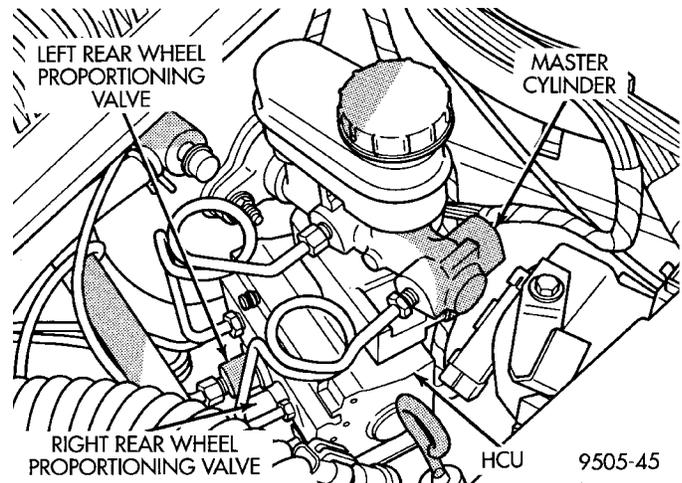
Rear Wheel Proportioning Valve Location On HCU
